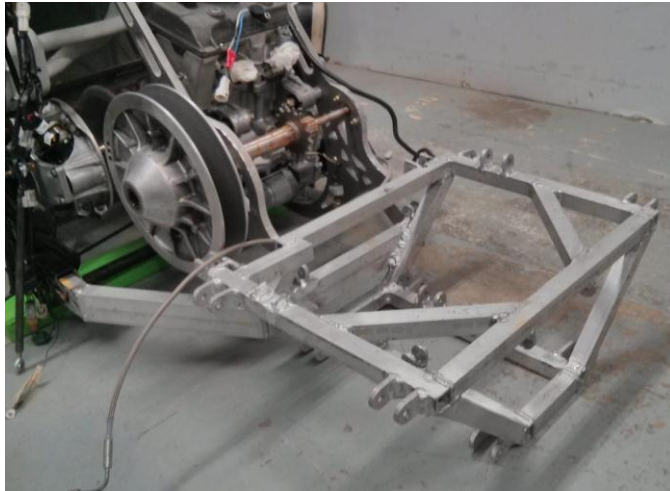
Welded Aluminum Rear Subframe on Car
